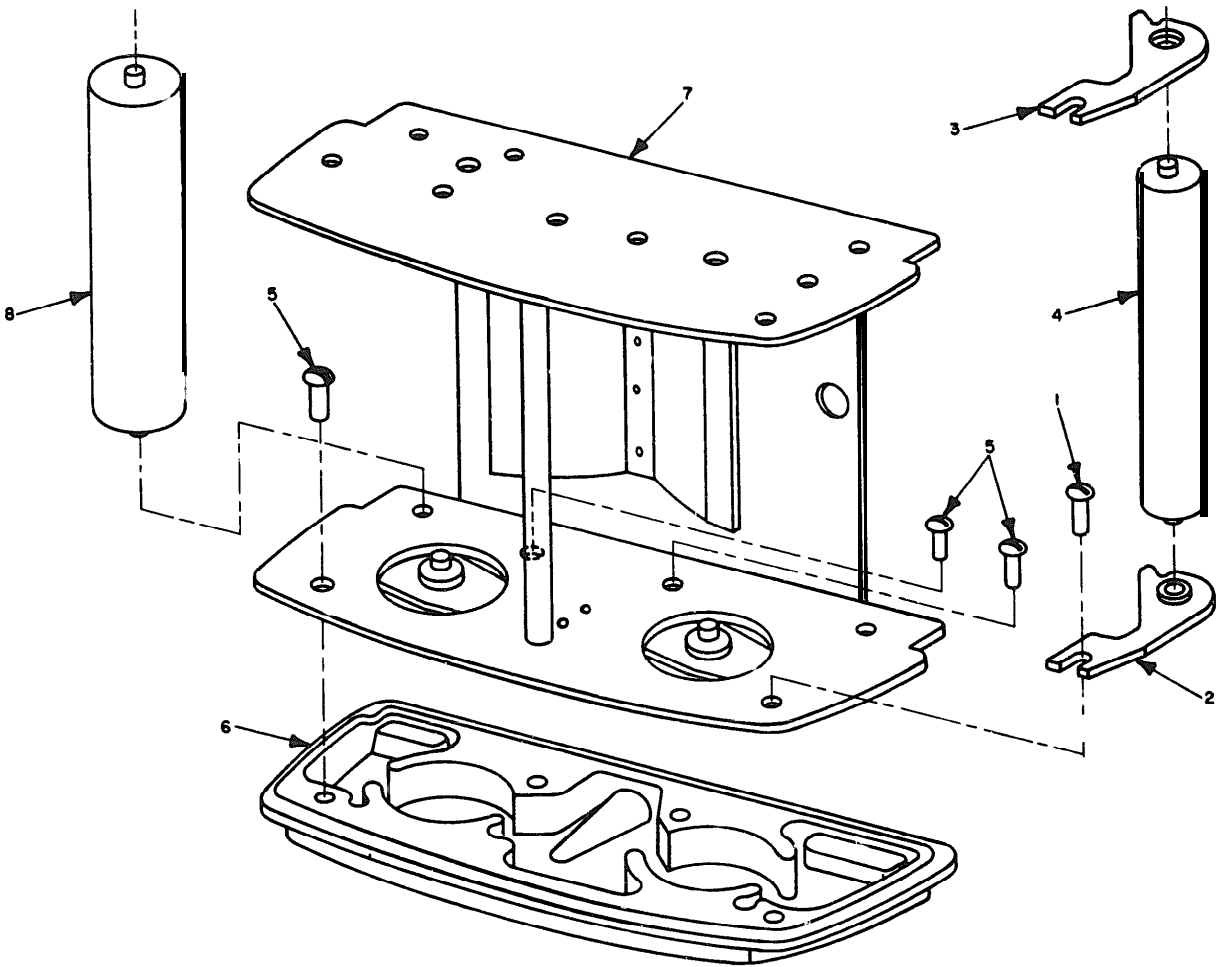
RH/10 Carriage complete, disassembly (stage 2) exploded view.
